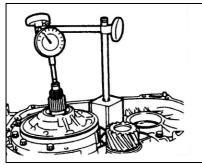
A-104 Standard value: 0.70~1.45mmm. (54) Install the oil filter. See Fig.11A-105.
